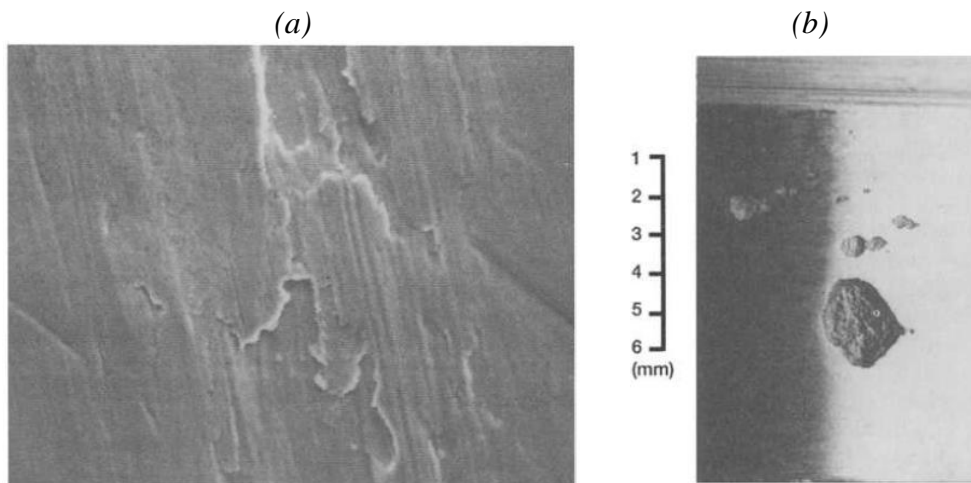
Examples wear scar appearances due to fatigue wear mechanism. (a) Spalling wear and (b) Pitting wear [61].
